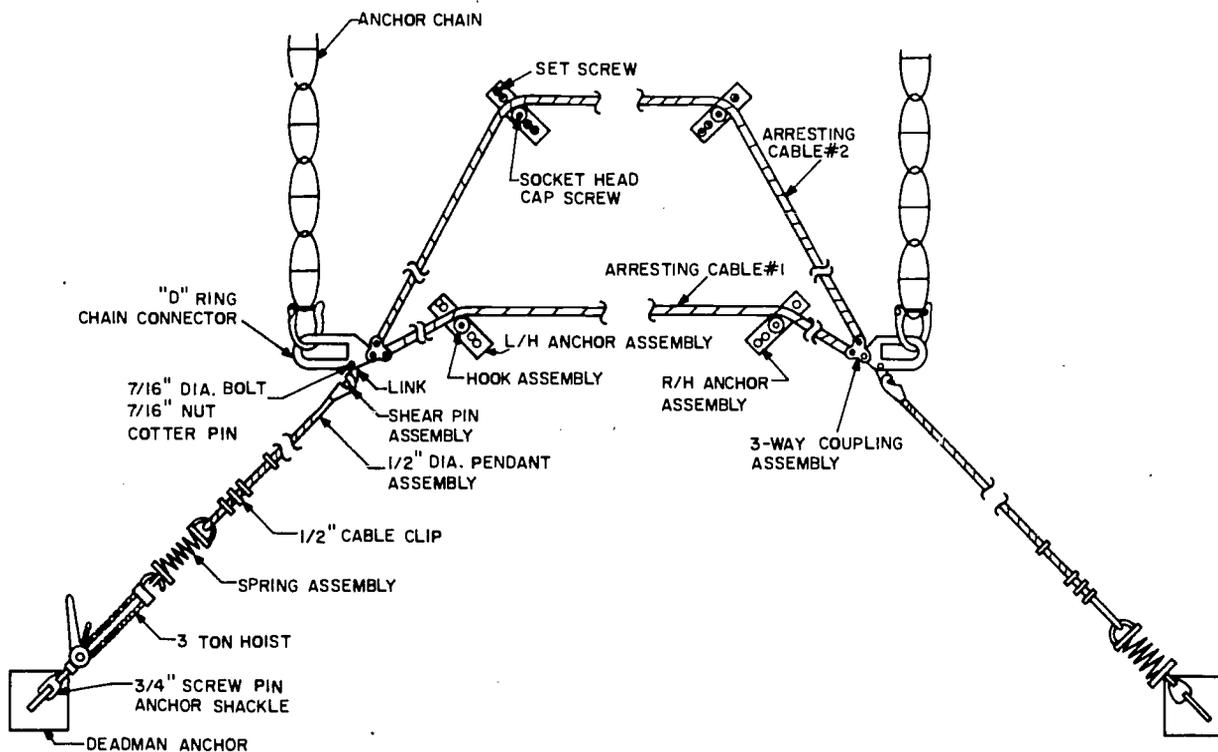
(A).— E-5 Mod 1 dual "shaped" arresting cable chain gear.
